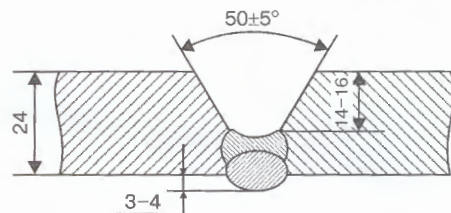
Appearance and parameters of groove preparation in the jacket lobes for automatic welding using the A-1381M device
